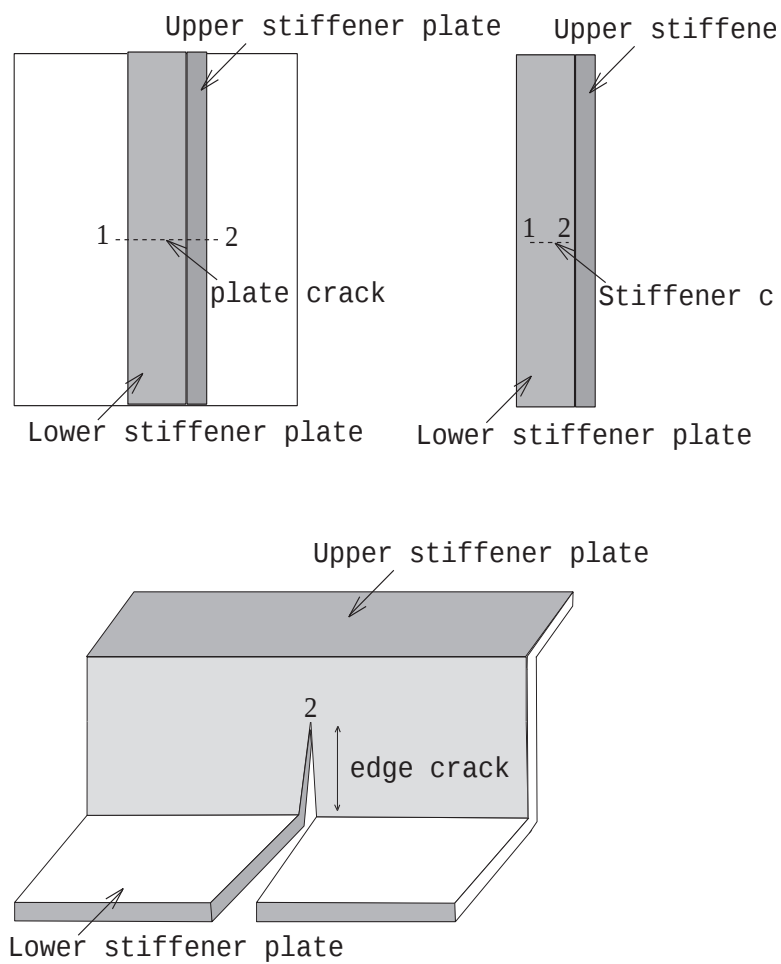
Stiffener riveted to plate: crack growth model
